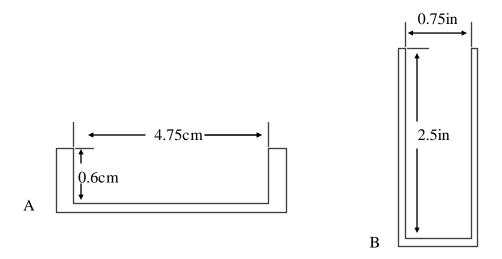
Drawing and dimensions of A) Rheometer cup and B) Copper Capsule
